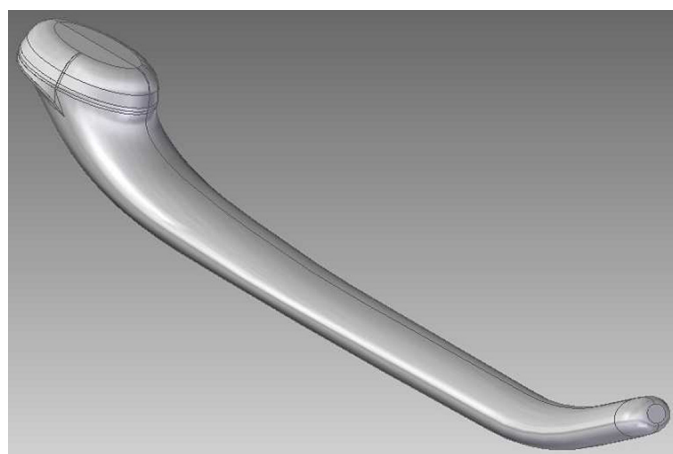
Shape of door handle used to production of helicopter (model CAD) [28]
